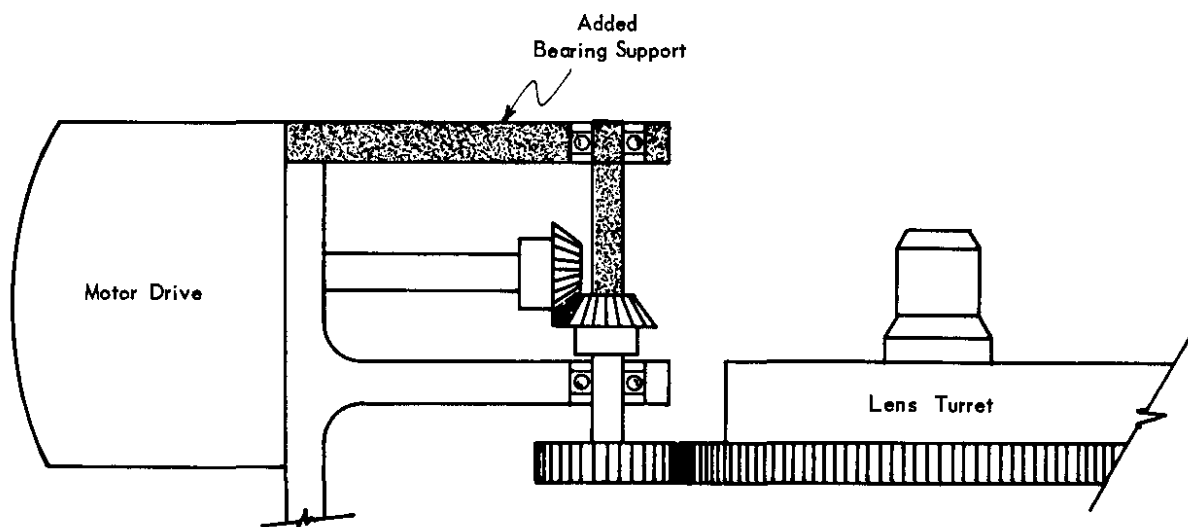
LENS TURRET DRIVE MECHANISM
